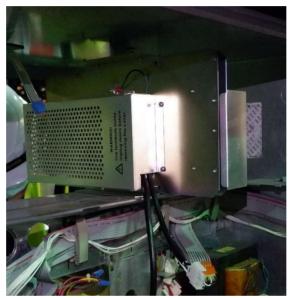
PSU Plate assembly mounting (Shown from Side-B)
